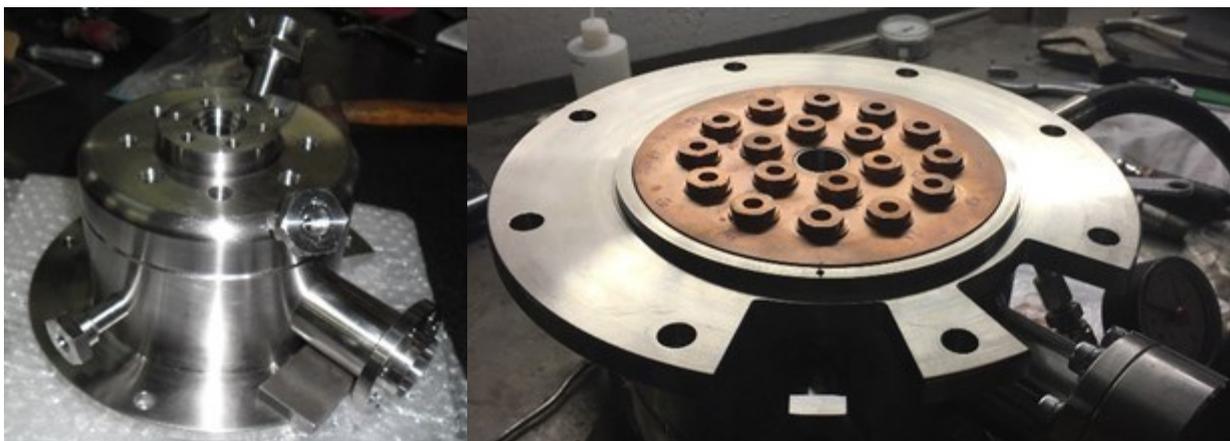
DEMO Injector head after assembly phase and during firing plate leak tests
